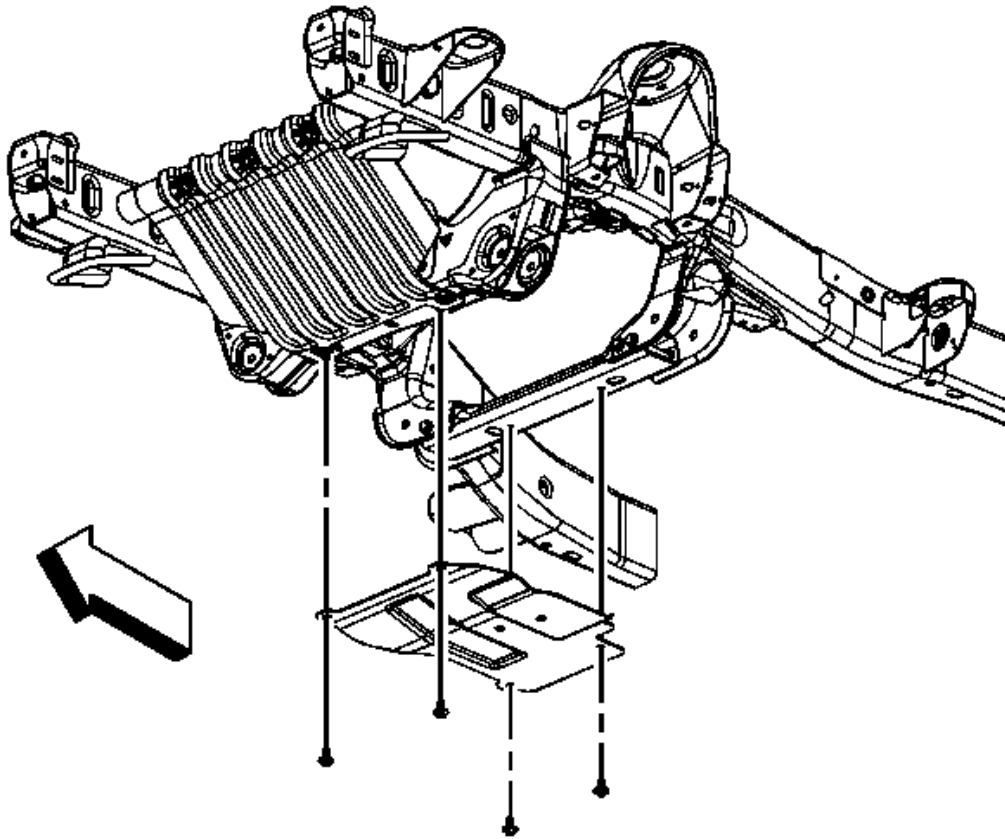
View Of Oil Pan Skid Plate & Bolts
